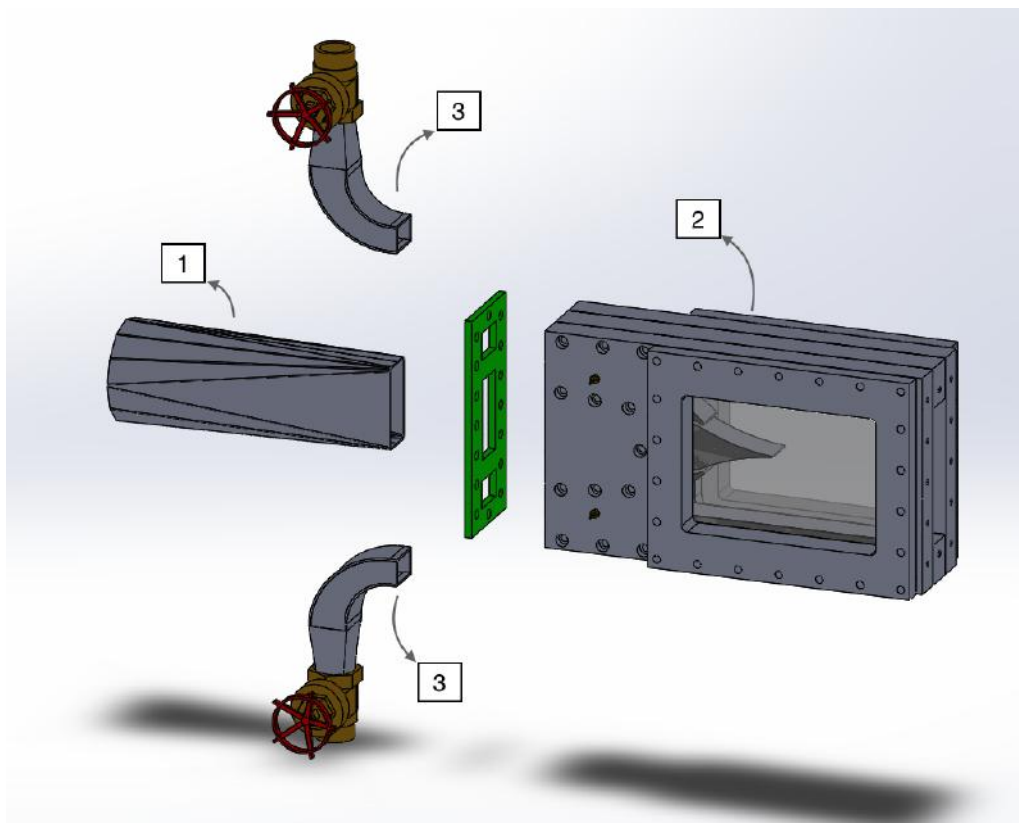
Split view of the three main parts of the nozzle and the connection back-piece.
